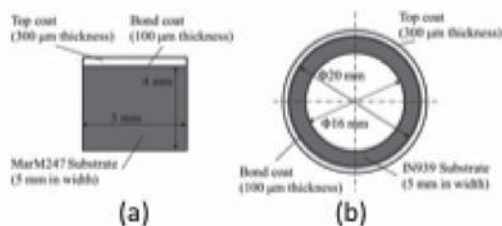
Specimens used for CMAS damage tests. (a) Plate specimen (b) Ring specimen.
